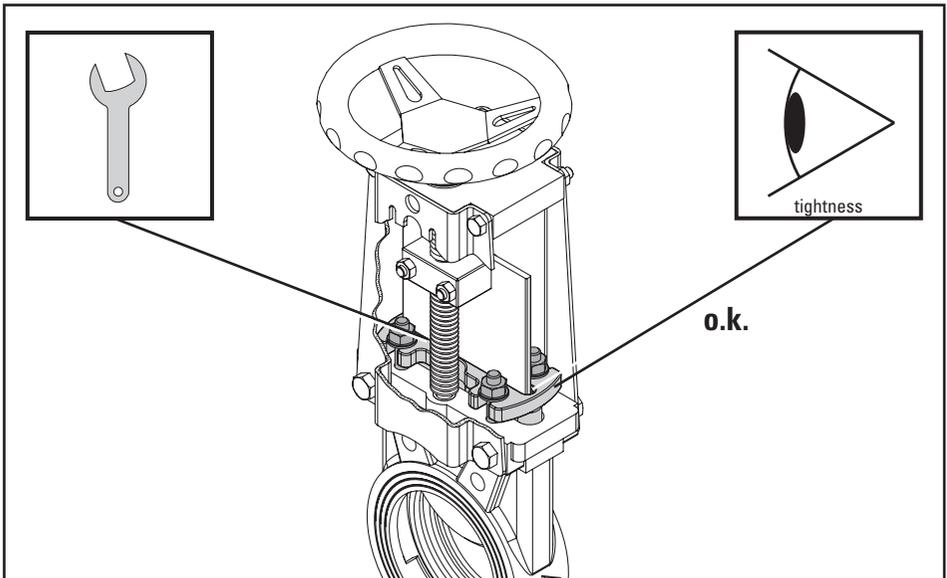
knife-gate-valve, readjusting of the gland
